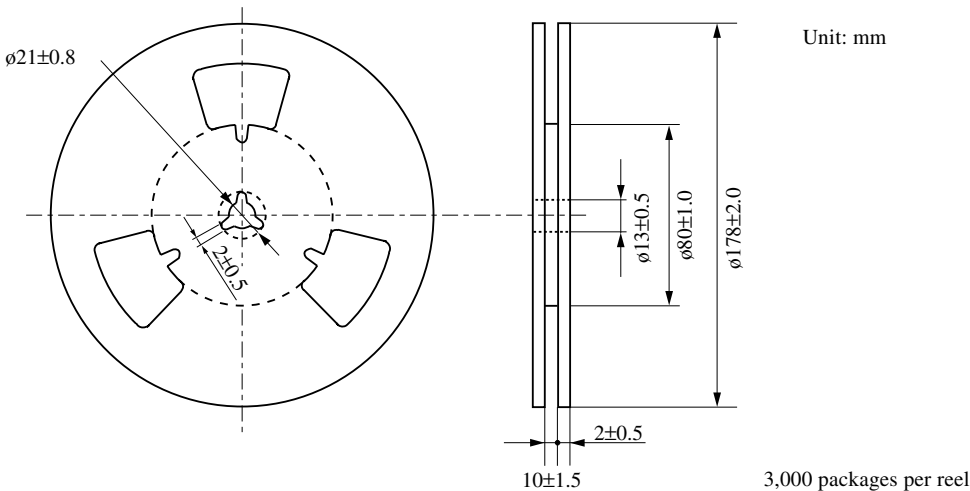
Embossed Taping Reel Dimensions for Mini Type Package
